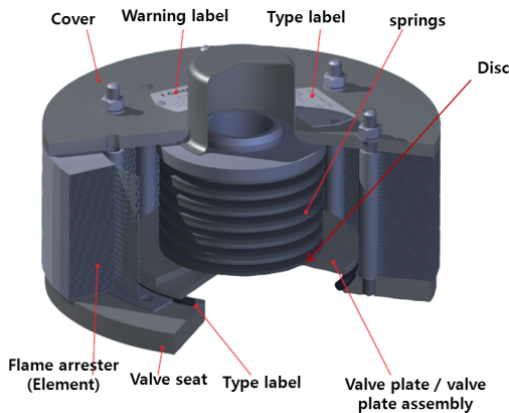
Structure of the explosion relief valve for the dual fuel engine
